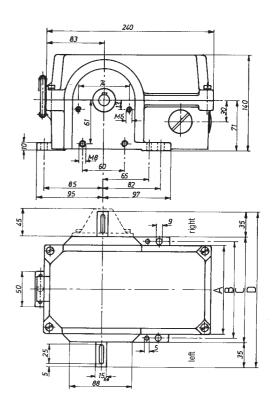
Table of Dimensions LNSE (without gear)
